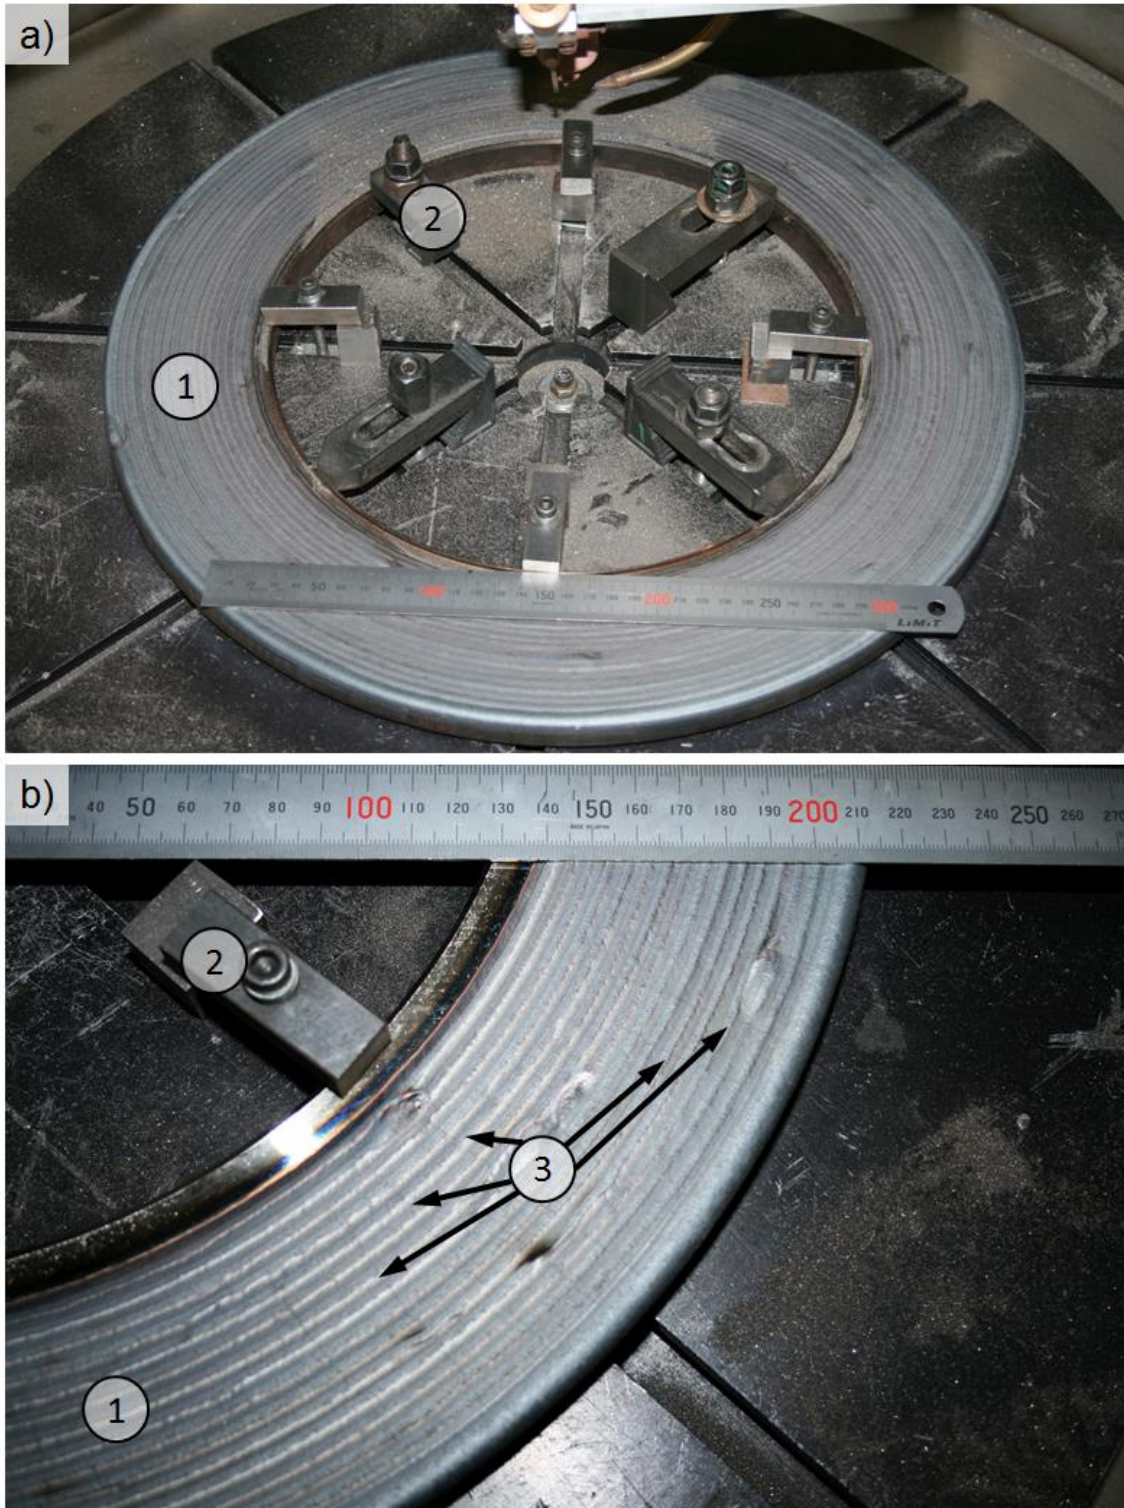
460 mm railway brake disc (non-ventilated), a) overview disc after first cladding; b) quarter view after first cladding; 1: wear surface; 2: clamping system; 3: radial cracks
